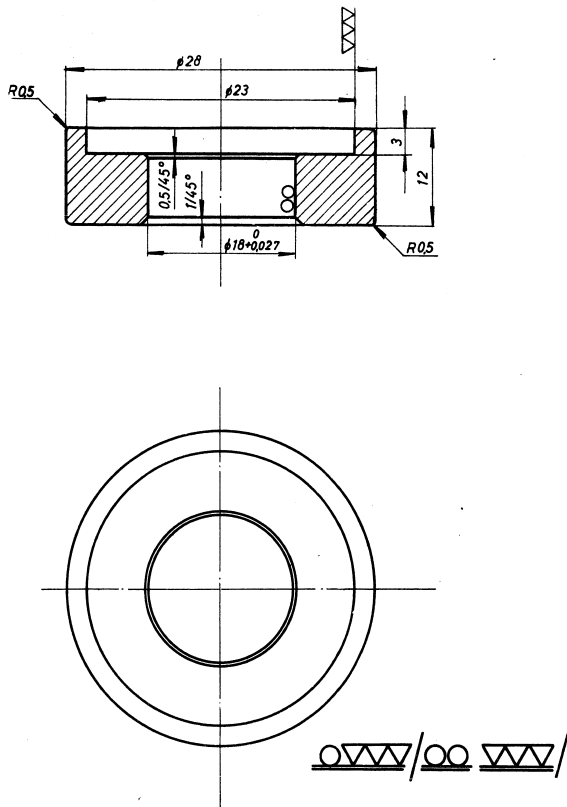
BREECHBLOCK GUIDE ROLLER
